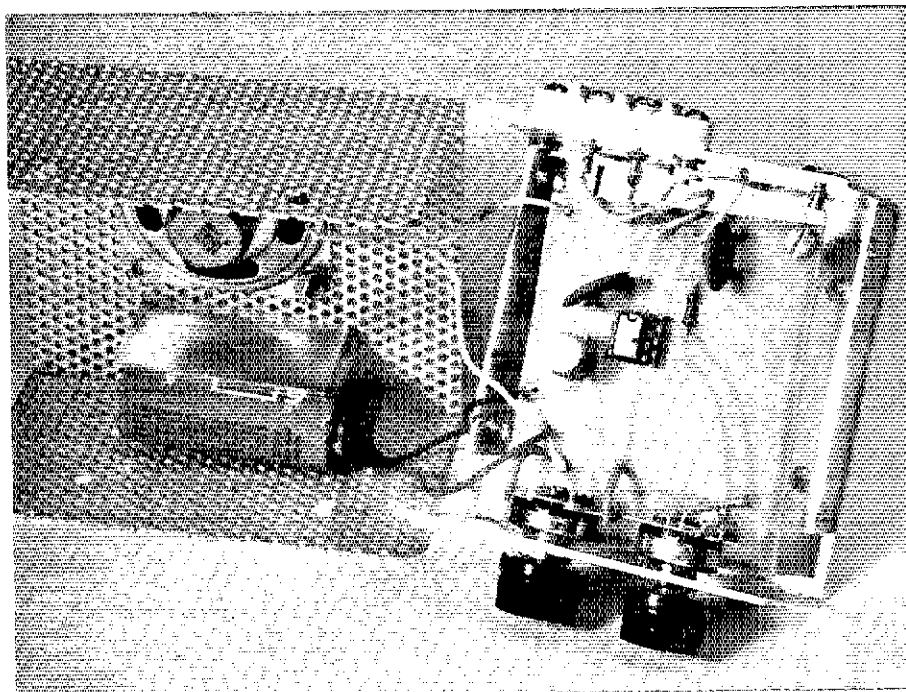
A close-up view of the circuit board construction used on the CPO-1. Both potentiometers were mounted directly on the circuit board.
